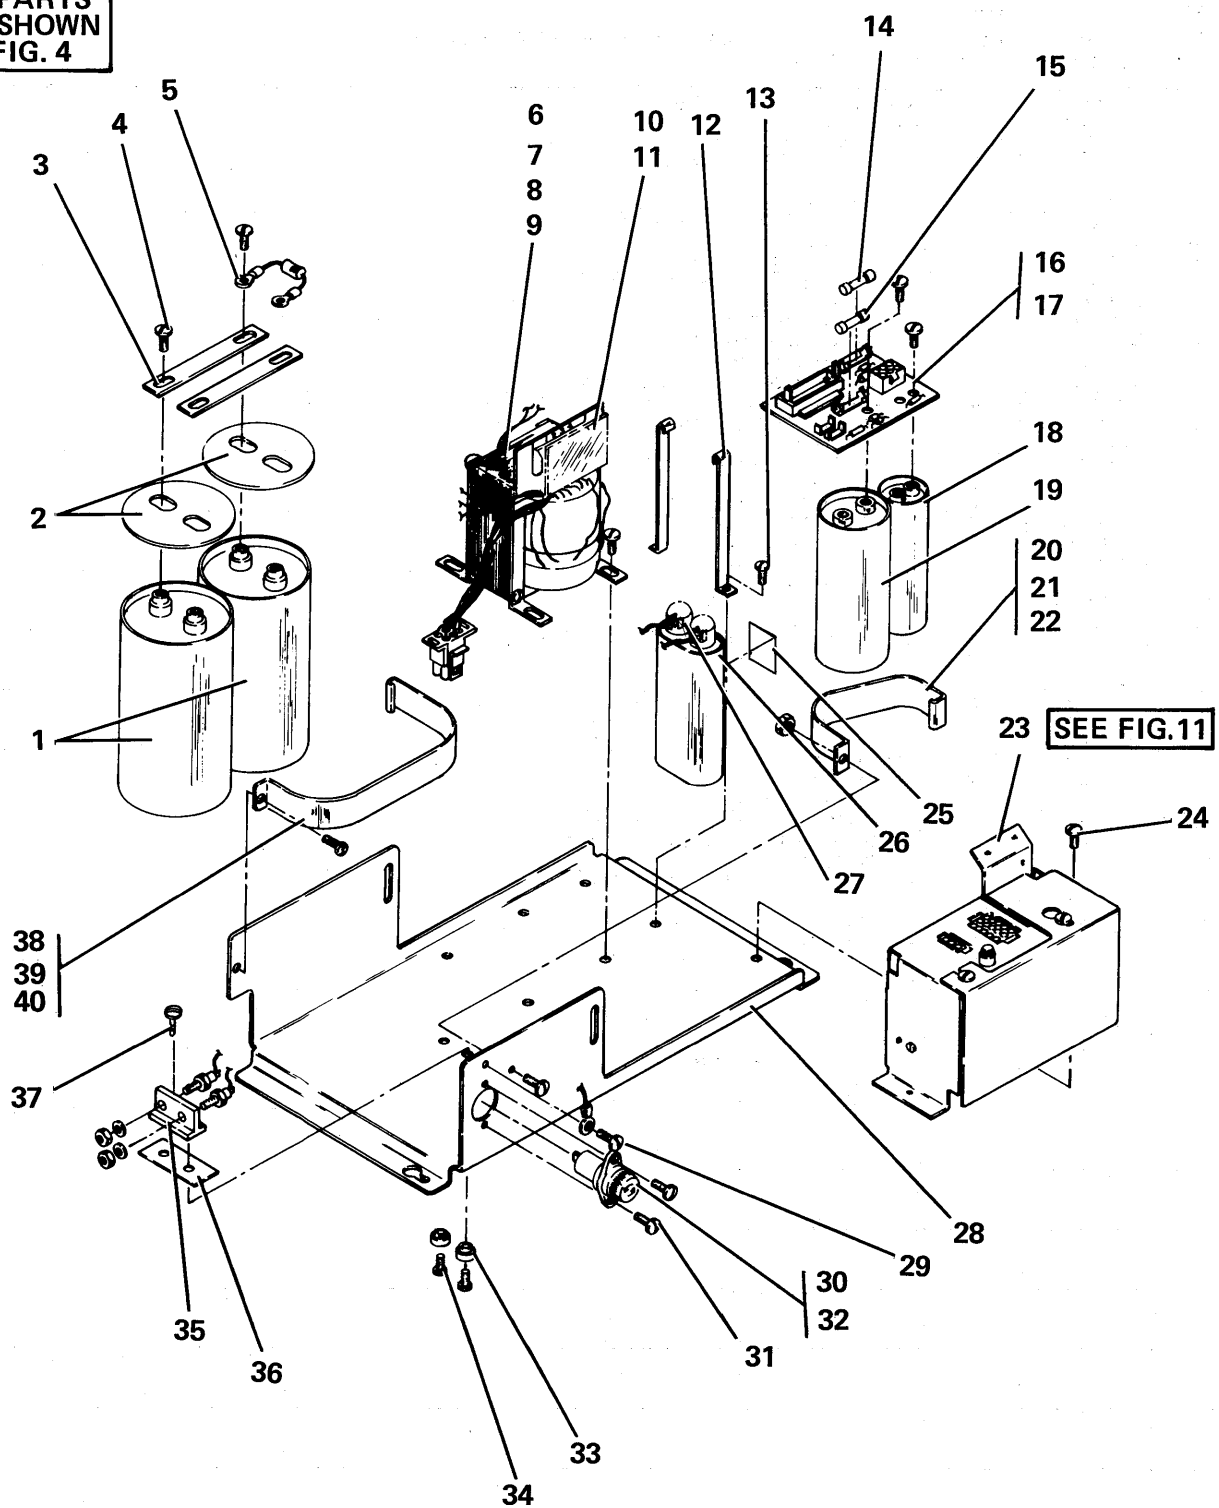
POWER SUPPLY ASSEMBLY. SEE LIST 13.
